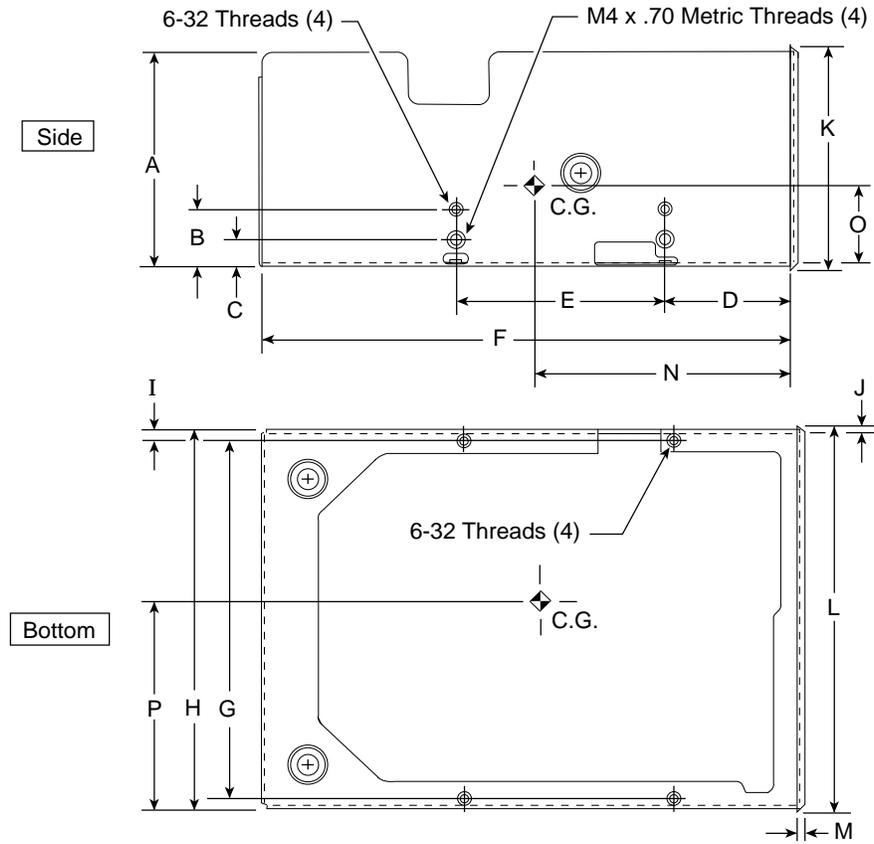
Mounting dimensions for ST43401N/ND and ST43402ND drives without a bezel
